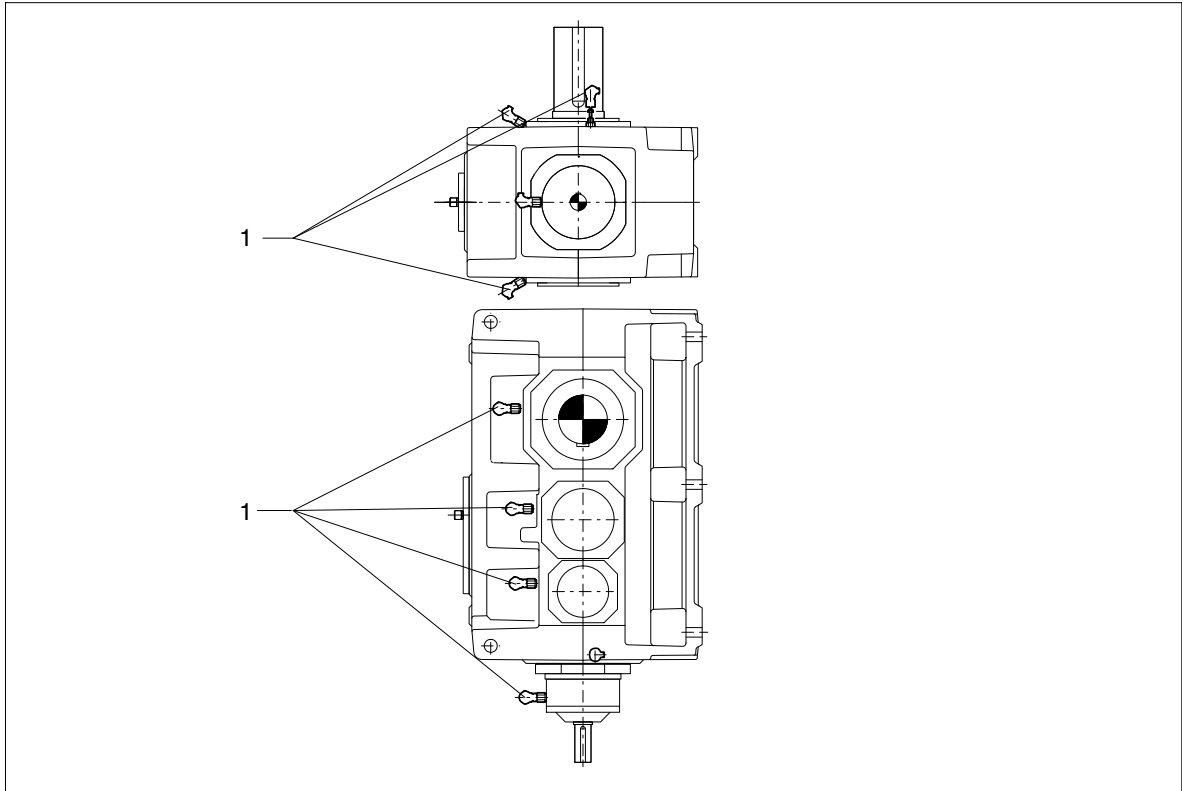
Bearing monitoring by Pt 100 resistance thermometer on gear units type B3.V
